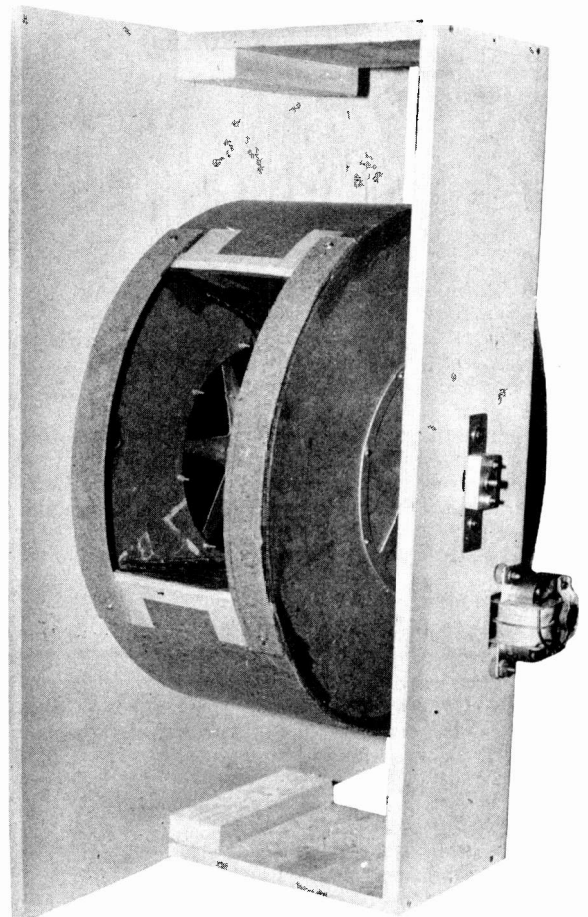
Construction of the rotating horn drum. This drawing shows the drum with one side removed
